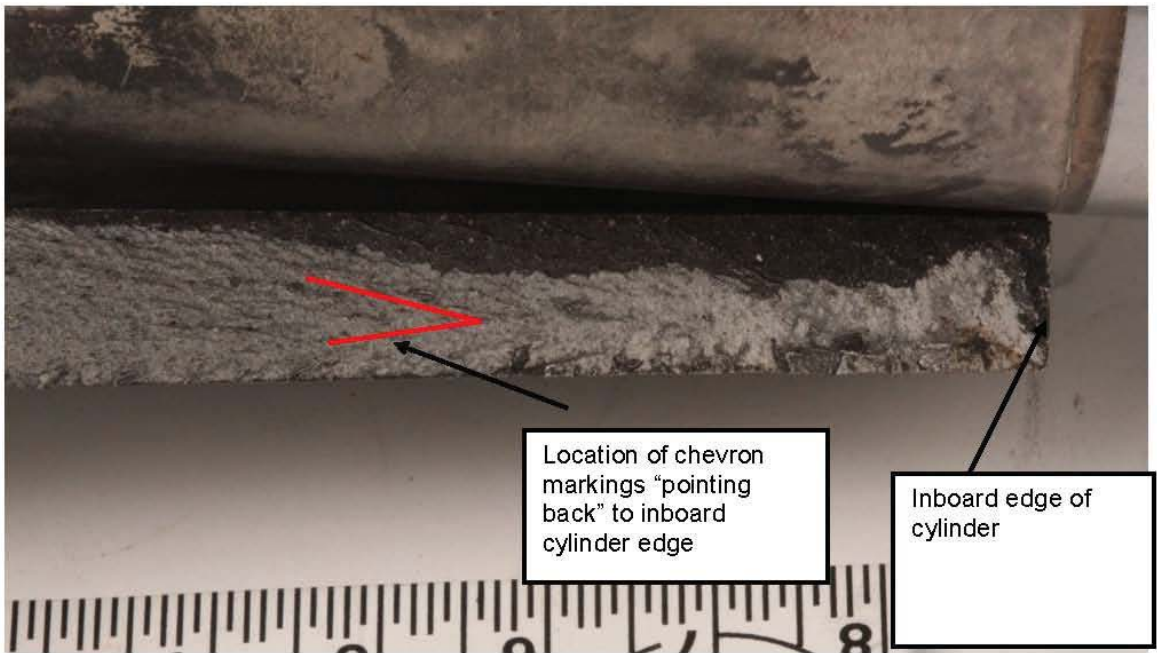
Showing the detail of fracture surface 'A2'.
